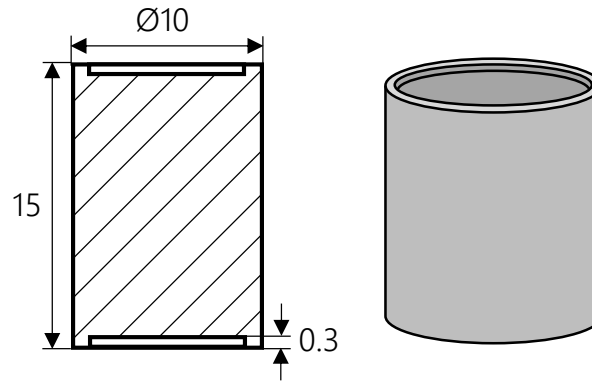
Dimensions and 3D-view of the cylindrical Rastegaev-specimens.
